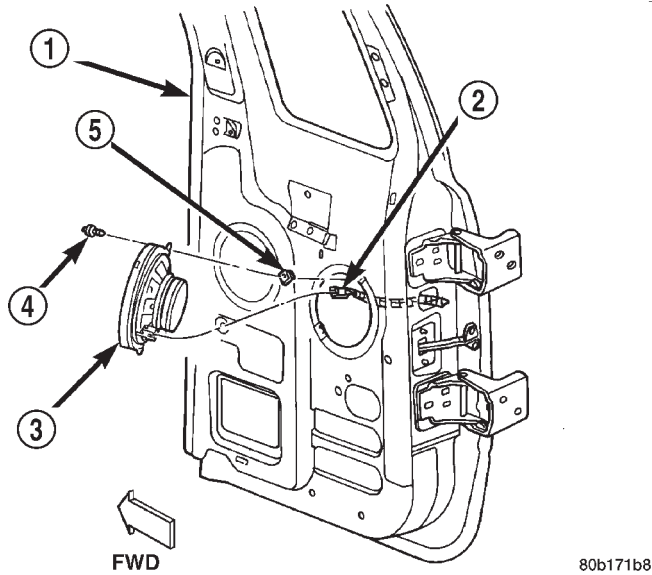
Rear Door Speaker Remove/Install - Quad Cab
